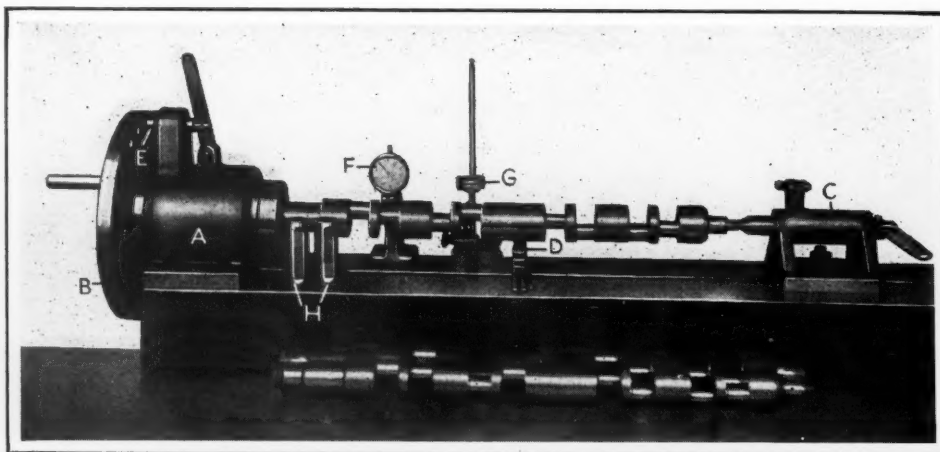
Indexing Type of Fixture Employed in the Inspection of Eccentric Shafts
